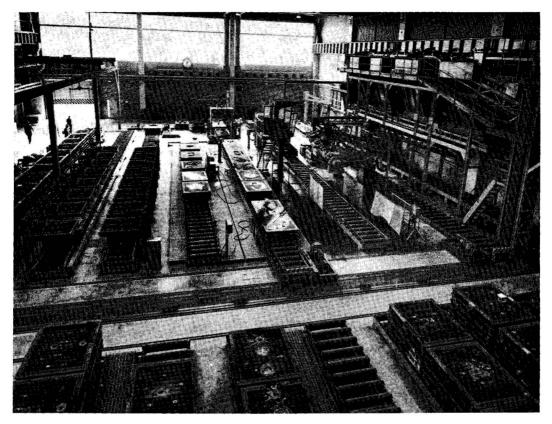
Mechanized sandslinger molding line for molds $1,200 \times 1,500 \times 400/400$ mm in size — installed in 1972. (Courtesy of Rauma Repola Oy)
